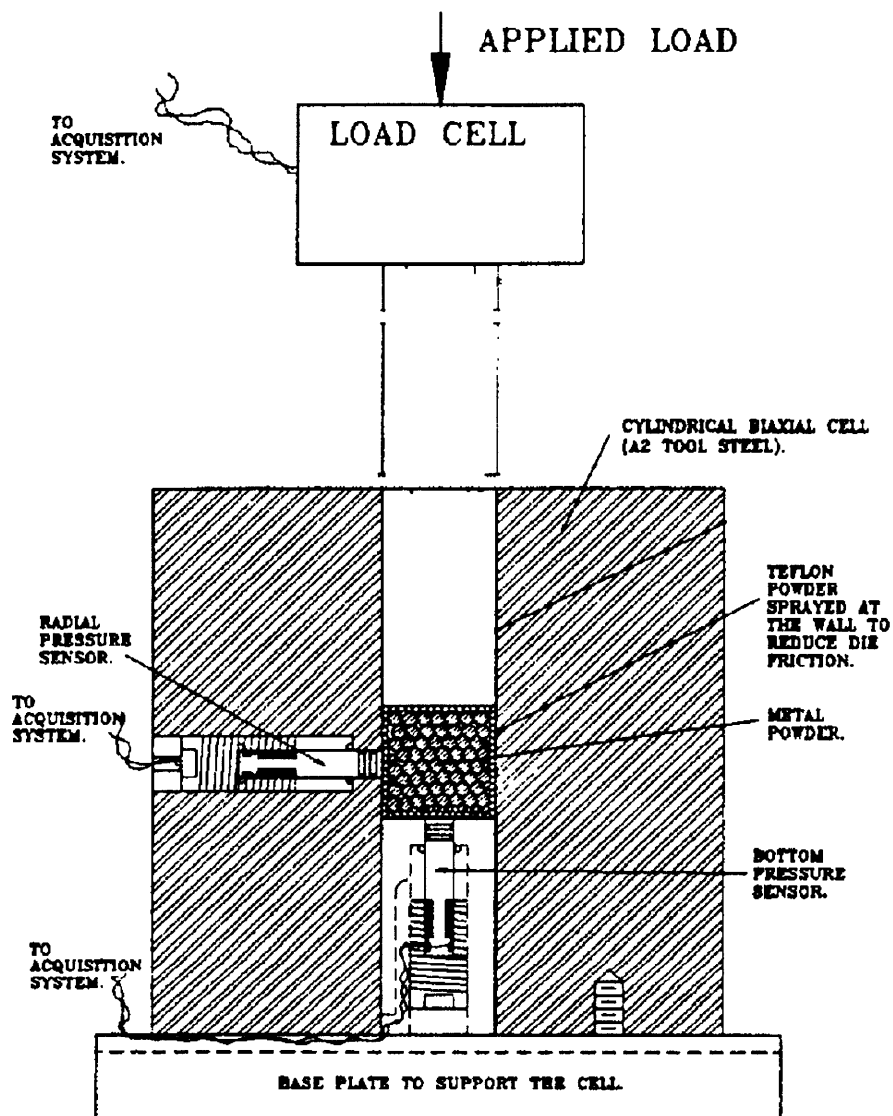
Uniaxial strain compression system assembled apparatus, pressure sensors, and specimen. After [34].
